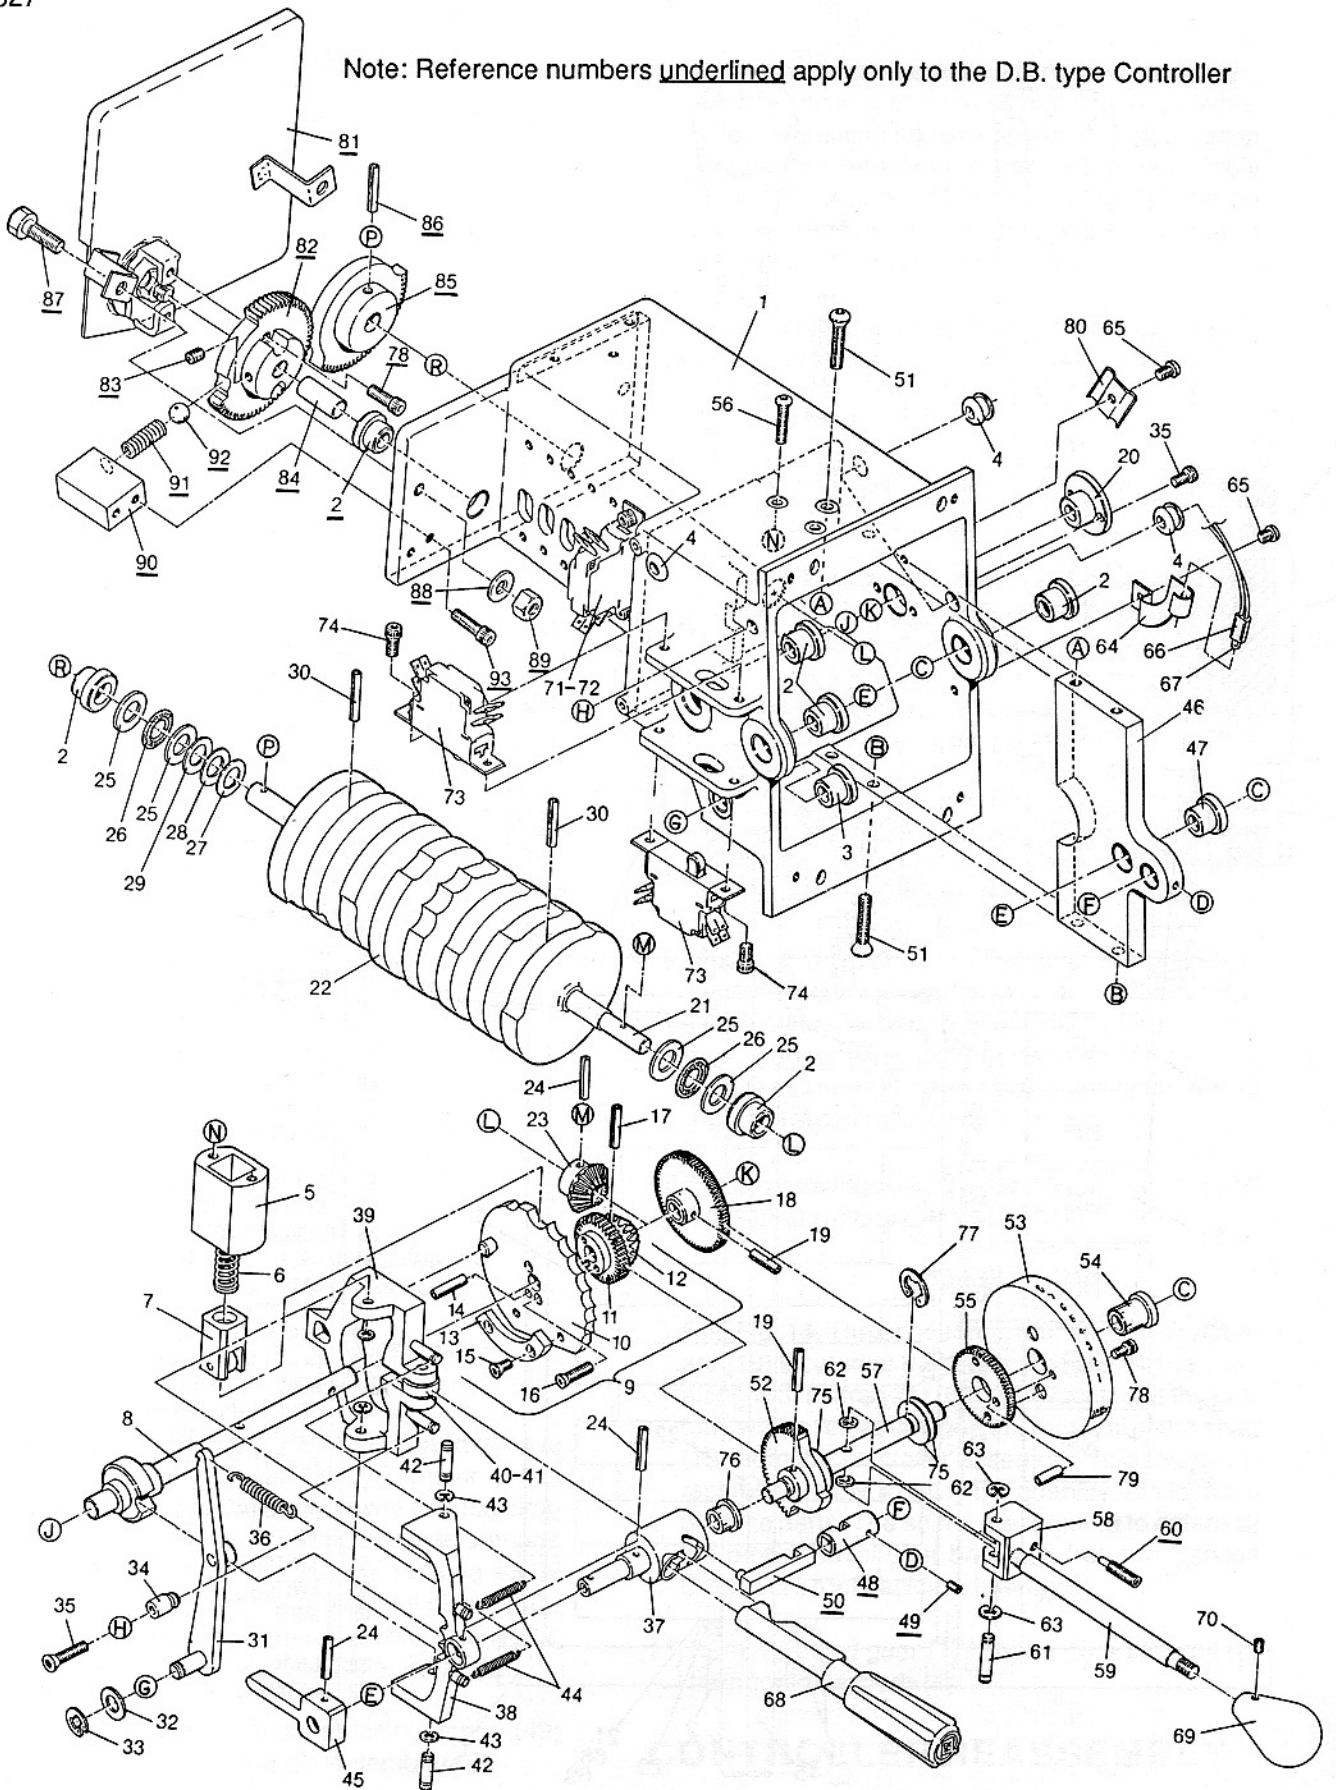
Controller Assembly (D.B. and Non D.B. Types)
